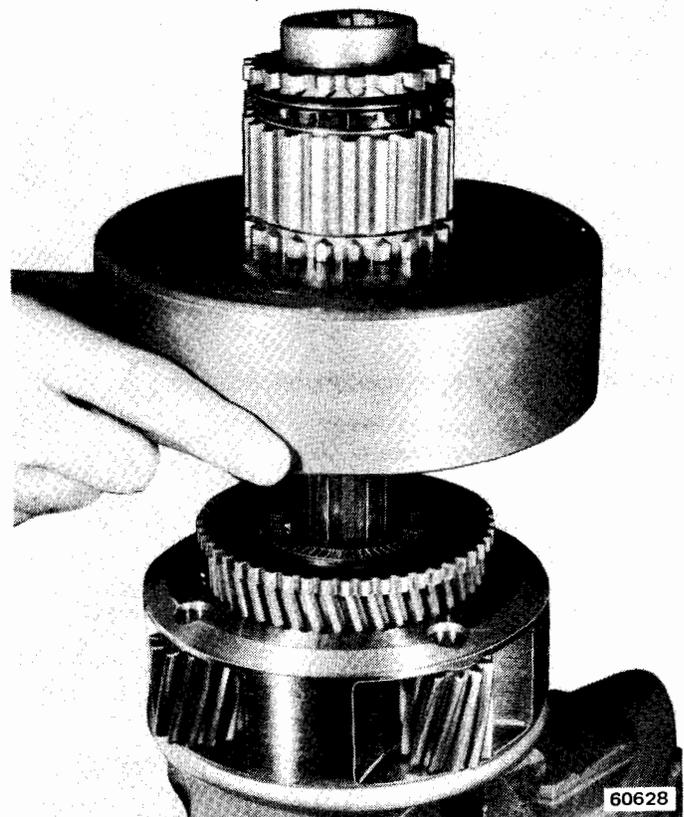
Removing Sleeve, Hubs, and Ring Gear Assembly
